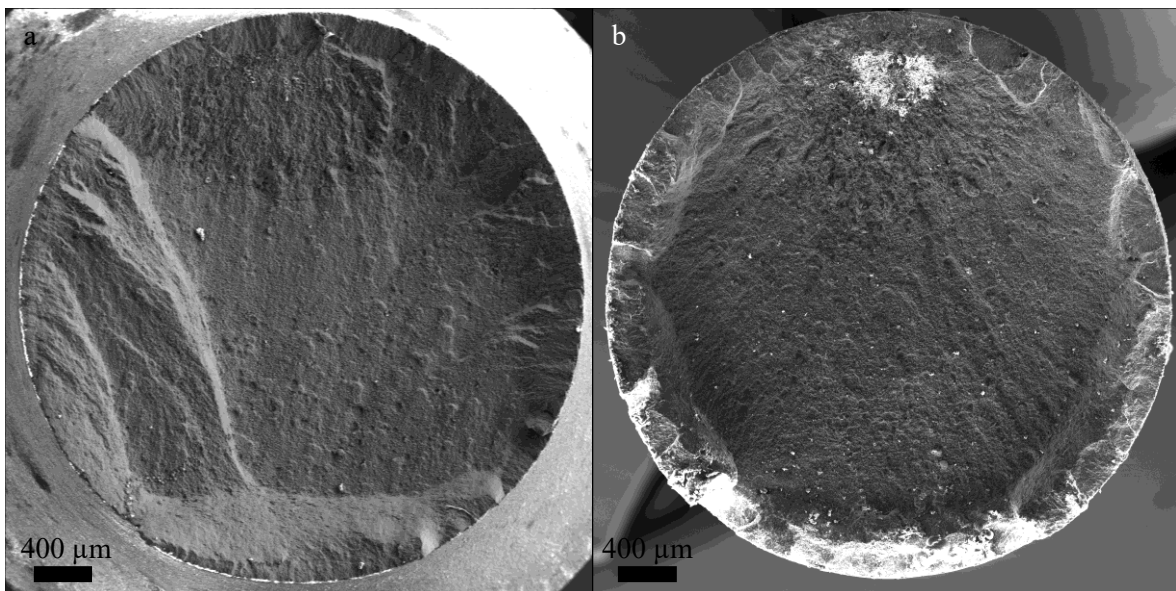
SEM images of PEO-coated SSRT specimens. Fracture surface of specimen tested at v2 (a). Fracture surface of specimen tested at v3 (b).
